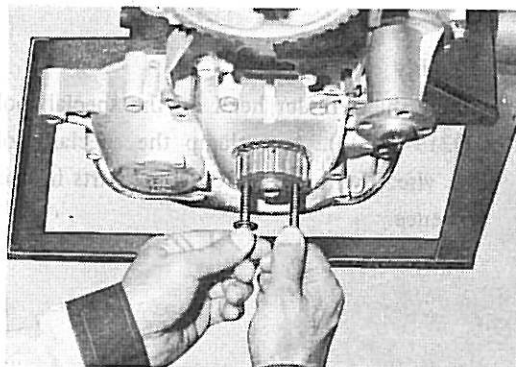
Removing Camshaft Timing Belt Pulley
